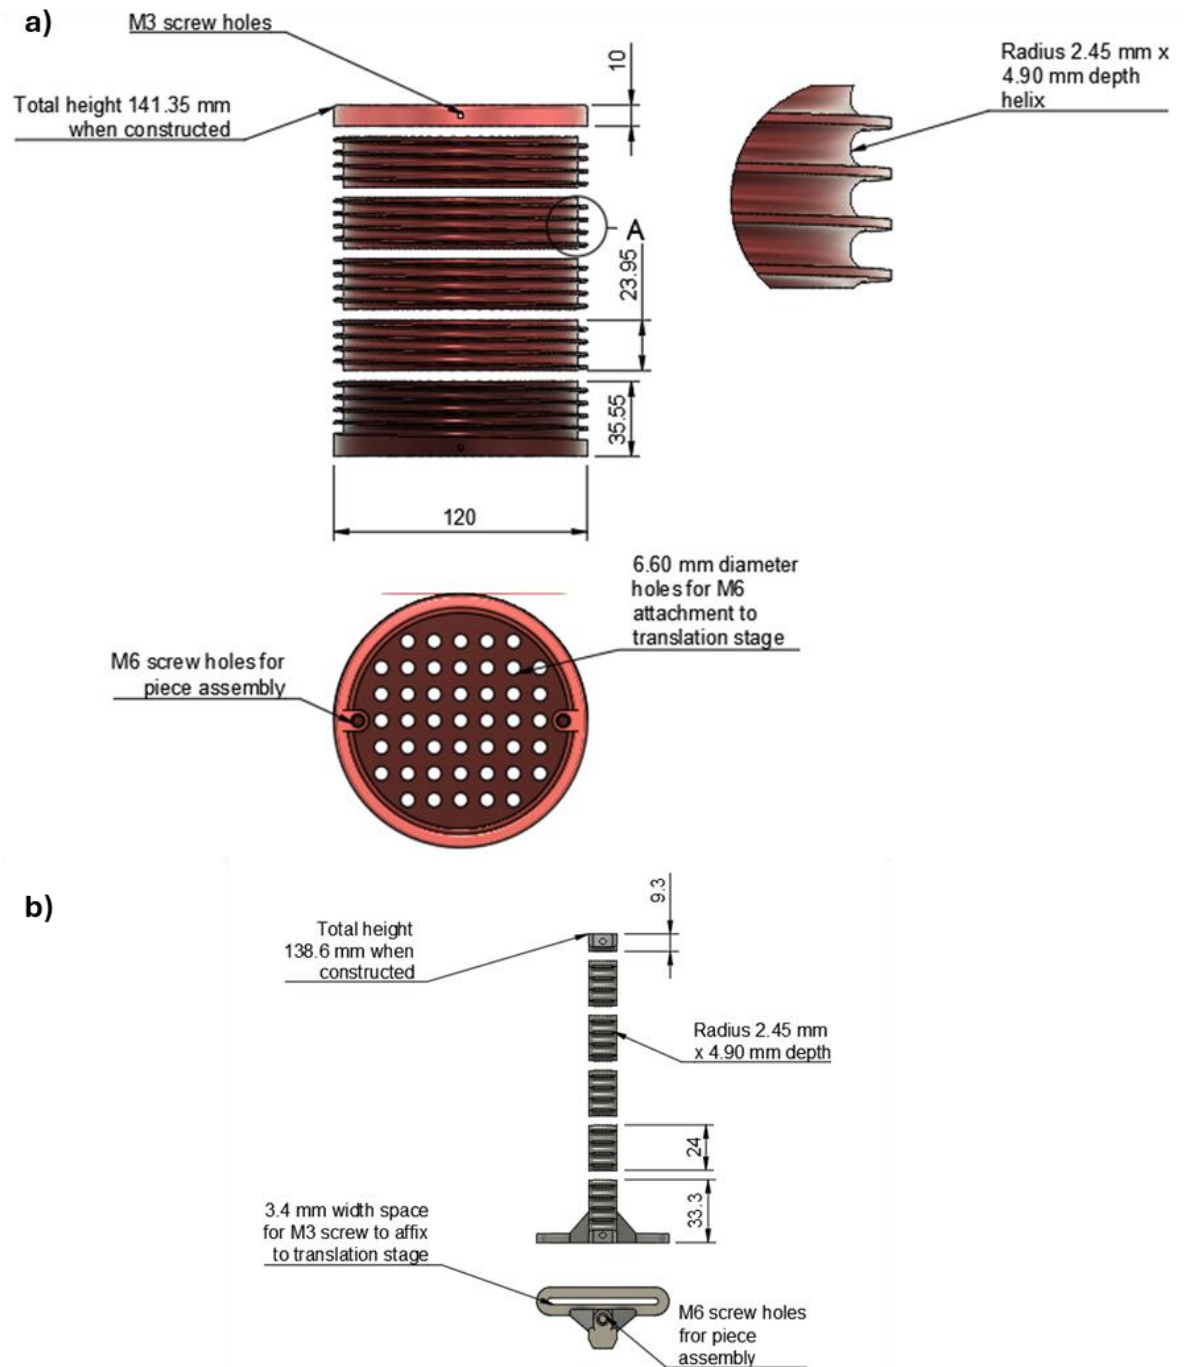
CAD drawings of a) KRAIC-S v2 column pieces with inset helix tubing guiding path with front and top view, and b) KRAIC-S v2 X-ray support posts with straight inset tubing guiding paths. Measurements displayed in mm units. Design is modular to enable 3D printing and designed to be constructed with M6 screws. Tubing held in place using post supports screwed into M3 screw holes in the column and X-ray window support posts.
